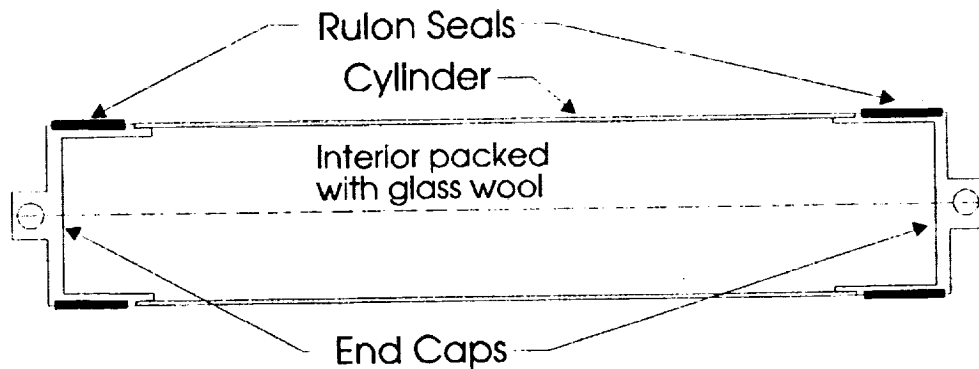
Second Stage Displacer Assembly from APD Drawing 259955A-P.
